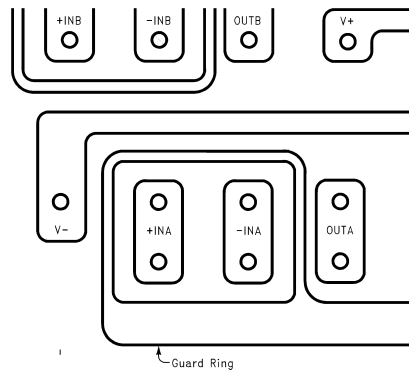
Example, using the LMC660, of Guard Ring in P.C. Board Layout
